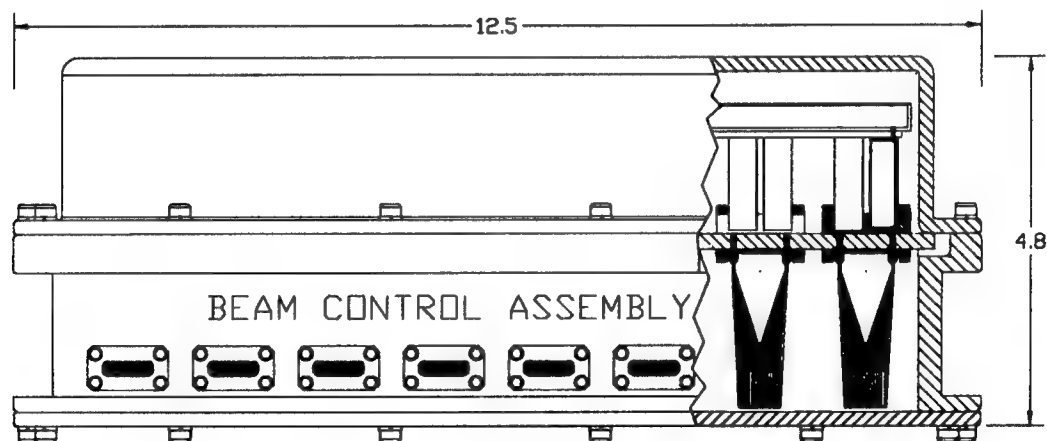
Remote Airborne Transmit Array Beam Control Cross-Section View
